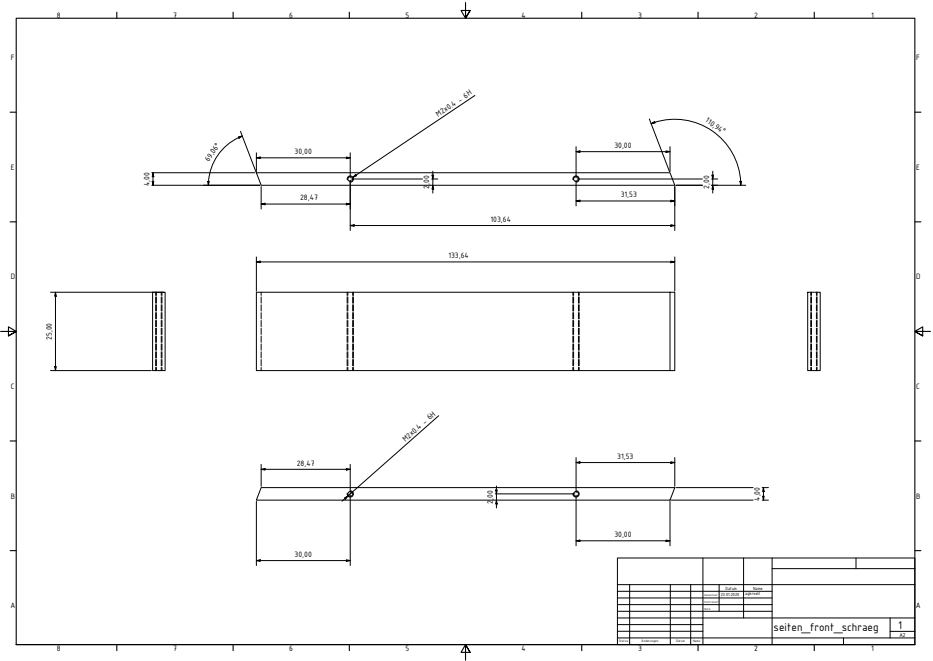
Technical drawing of the sloping side plate of a box from the front part of the pair spectrometer.
